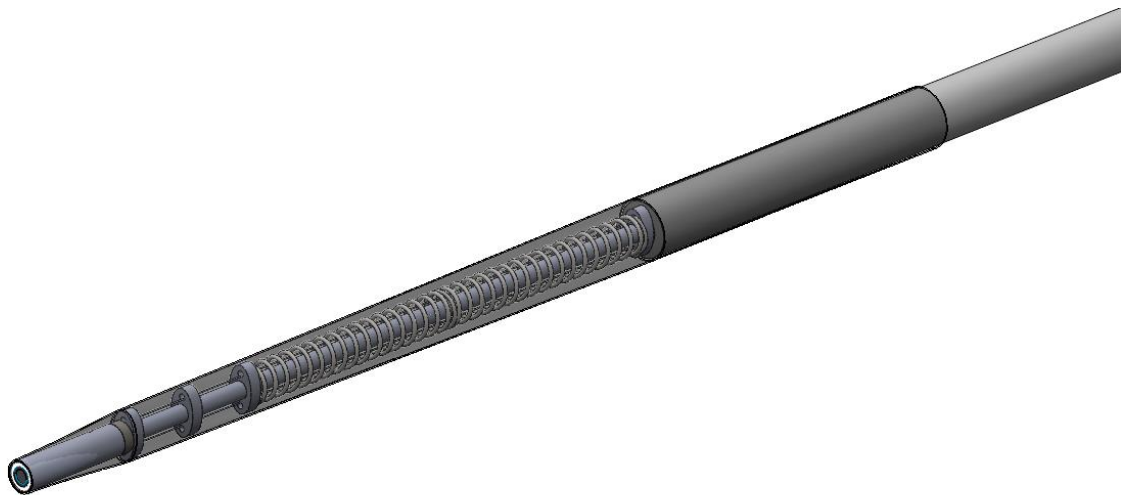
Prototype 4 Flexible Rod. The redesign rod included a semi-rigid plastic tube, springs for a flexible portion, and spaced wire guides for the bending tip.
